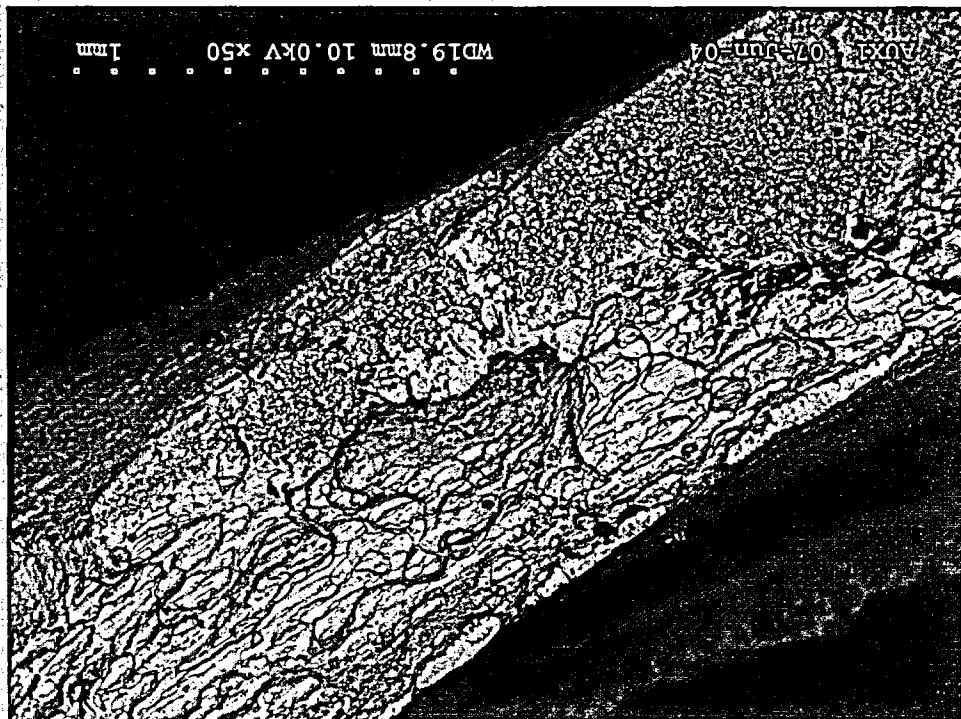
BSE image of bottom edge of IGSCC on burst rupture surface of 1H TSP. 50X
